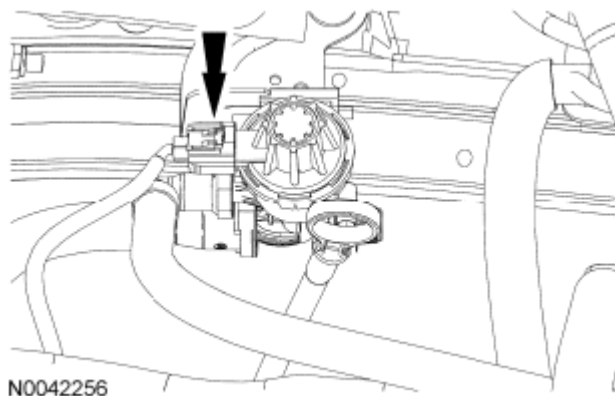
Locating Evaporative Emission Canister Purge Valve Electrical Connector
